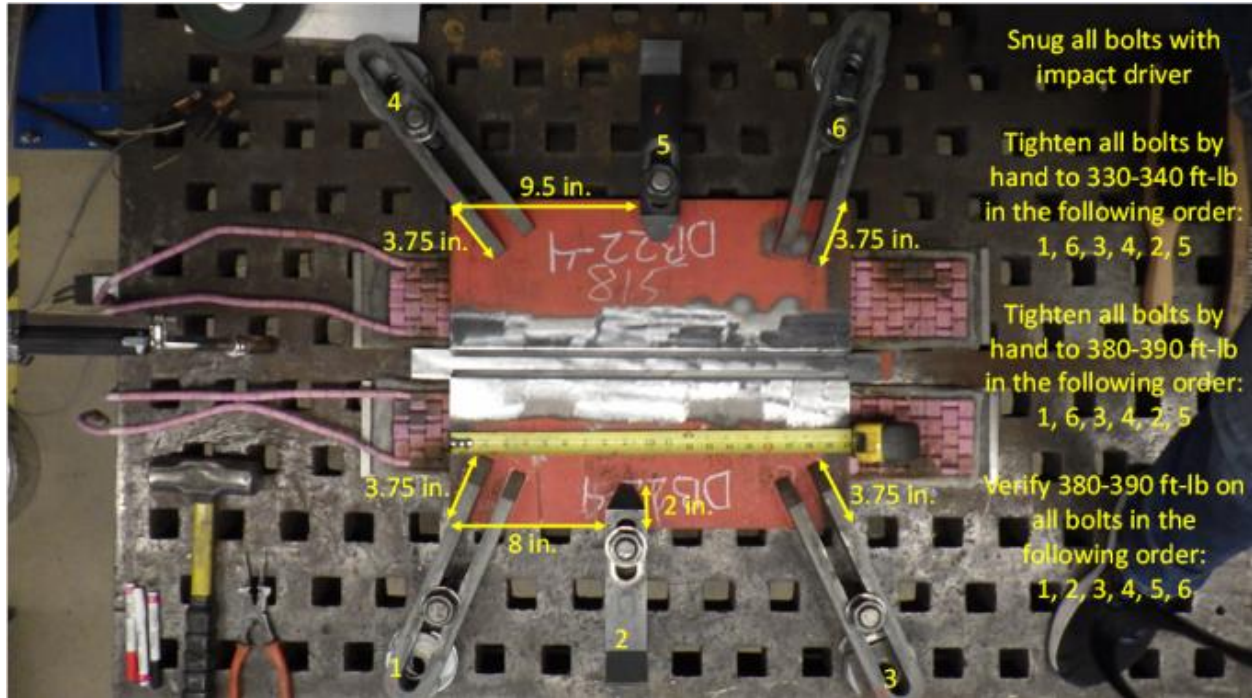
Schematic detailing the fabrication setup for a weld.
